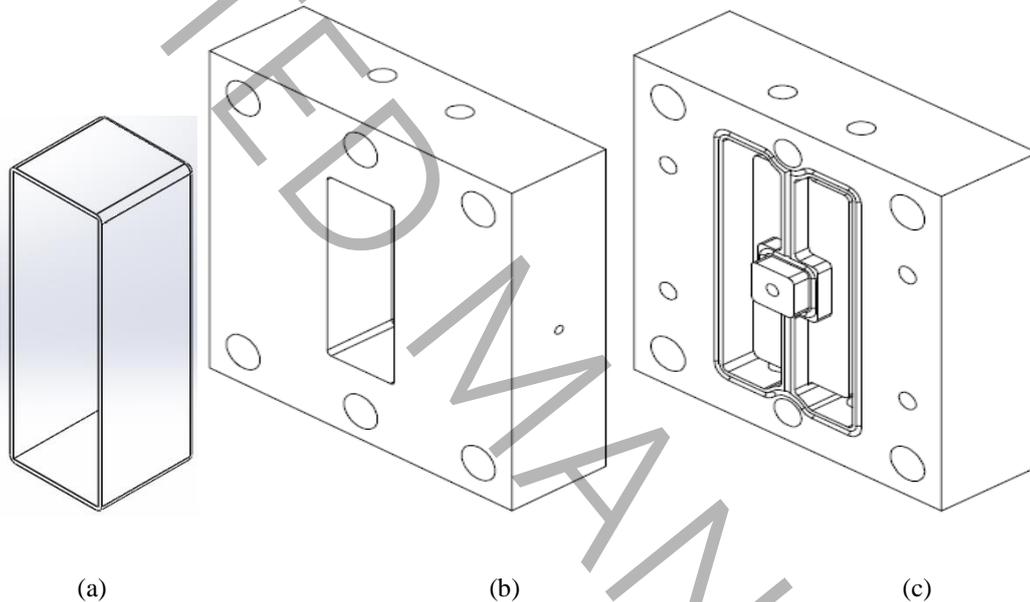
(a) part model (b) front view of Cavity plate (c) rear view of cavity plate with milled groove CCC
